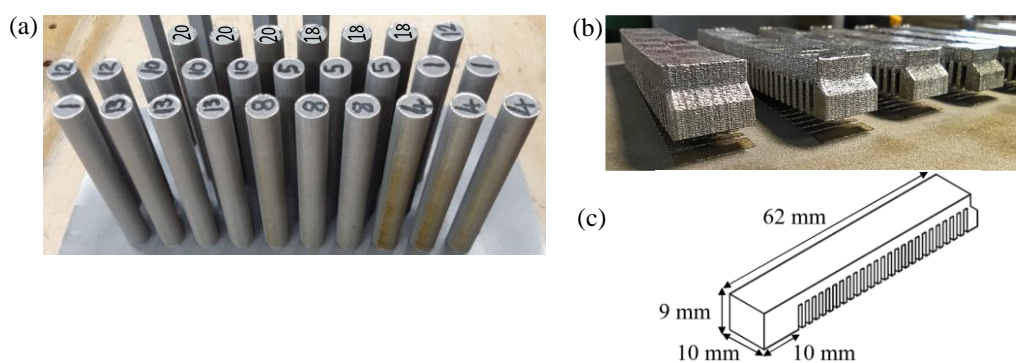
(a) cylindrical sample build and (b) cantilever build—partially wire-cut showing curved deflection of end-tip (c) drawing of cantilever beam with outer dimensions.
